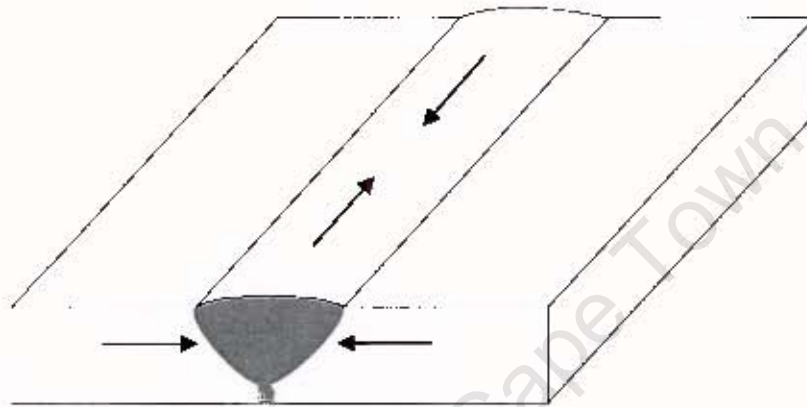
Shrinkage of the weld due to cooling
